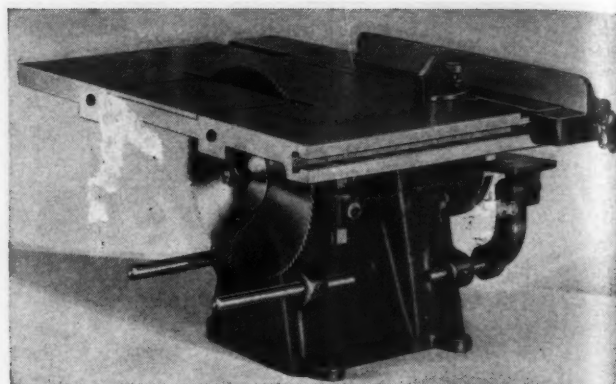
Machine Shown in Fig. 1 Equipped for Sawing
